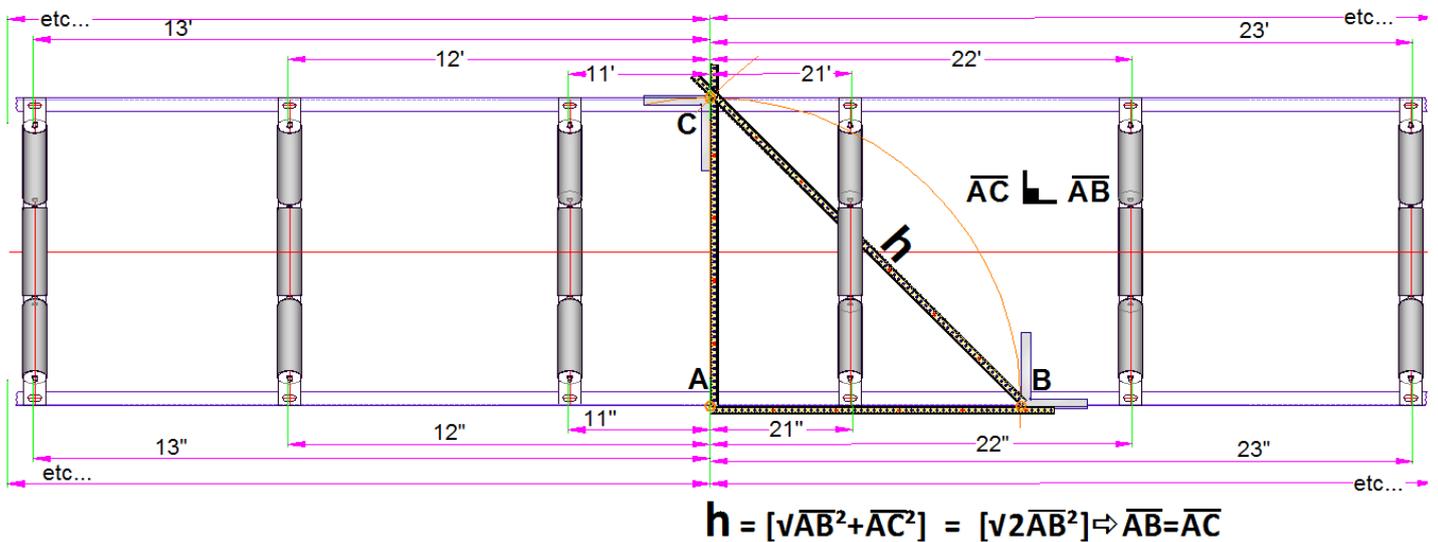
Adjusting idlers more than 10 m from a pulley. Reference system perpendicular to the conveyor axis
